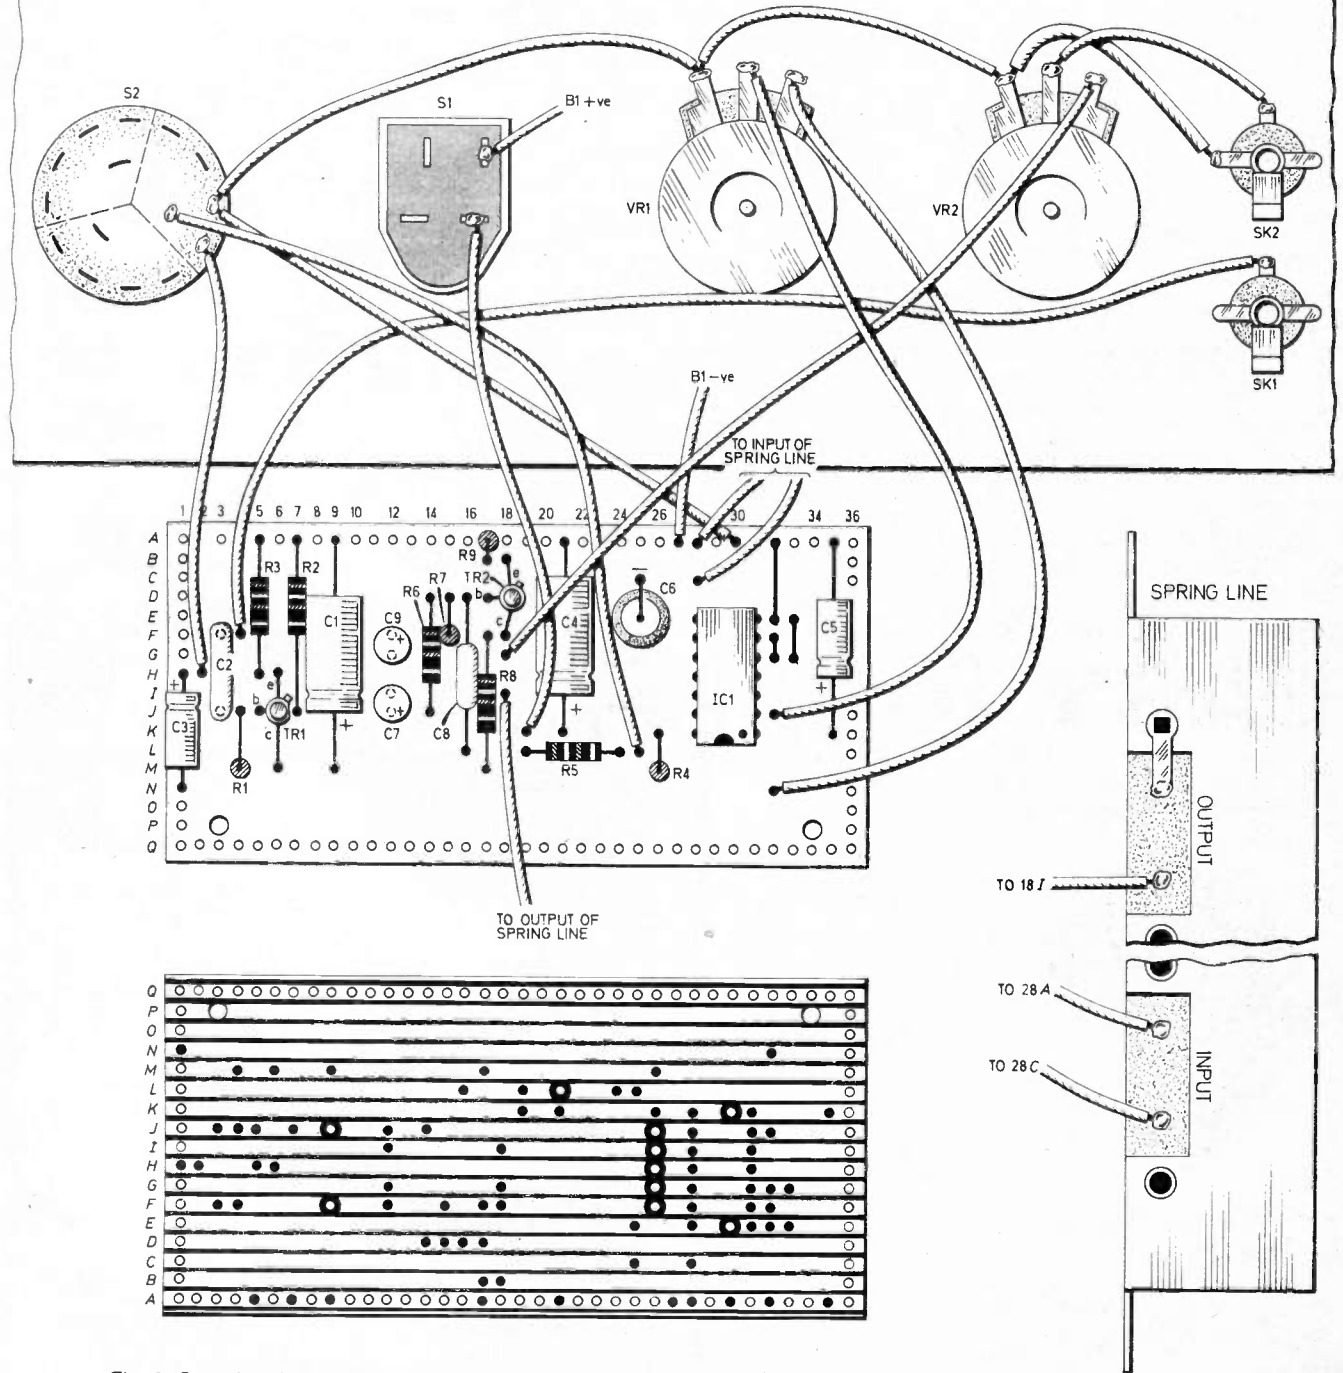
Complete interwiring details, component layout on the circuit board and underside of stripboard showing breaks to be made in the copper strips.
